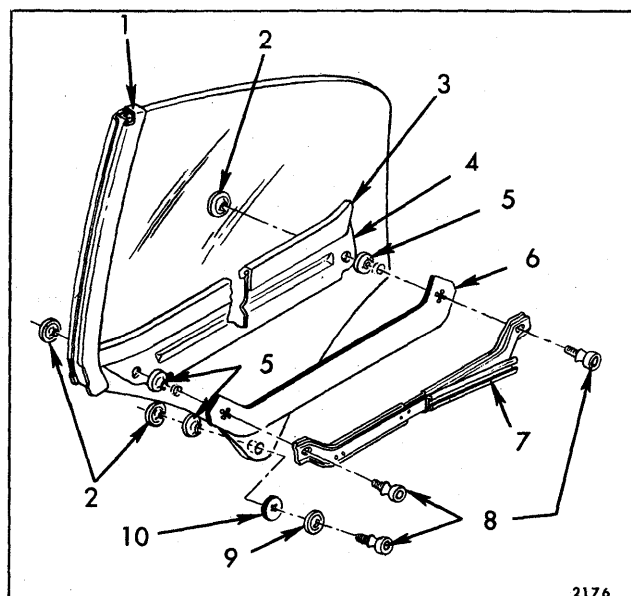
Rear Quarter Window Assembly - Chevrolet "B-47" Style
